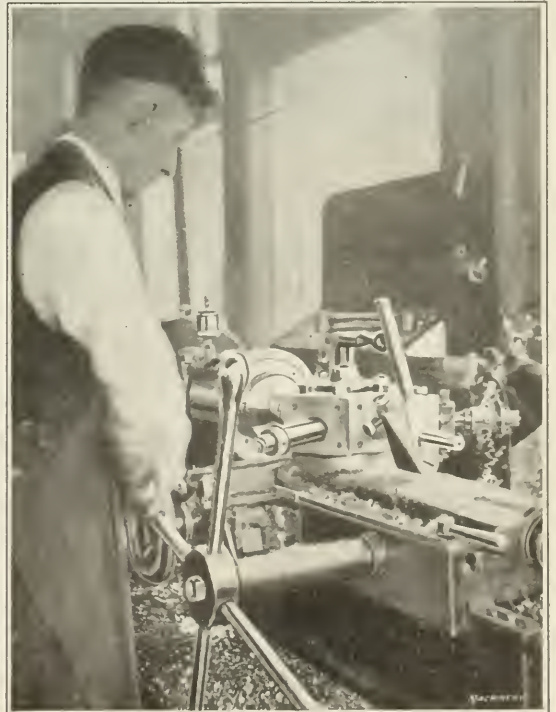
Machining Head and Primer Pocket in a Warner & Swasey No. 4 Hand Screw Machine at the Rate of Seventy per Hour
